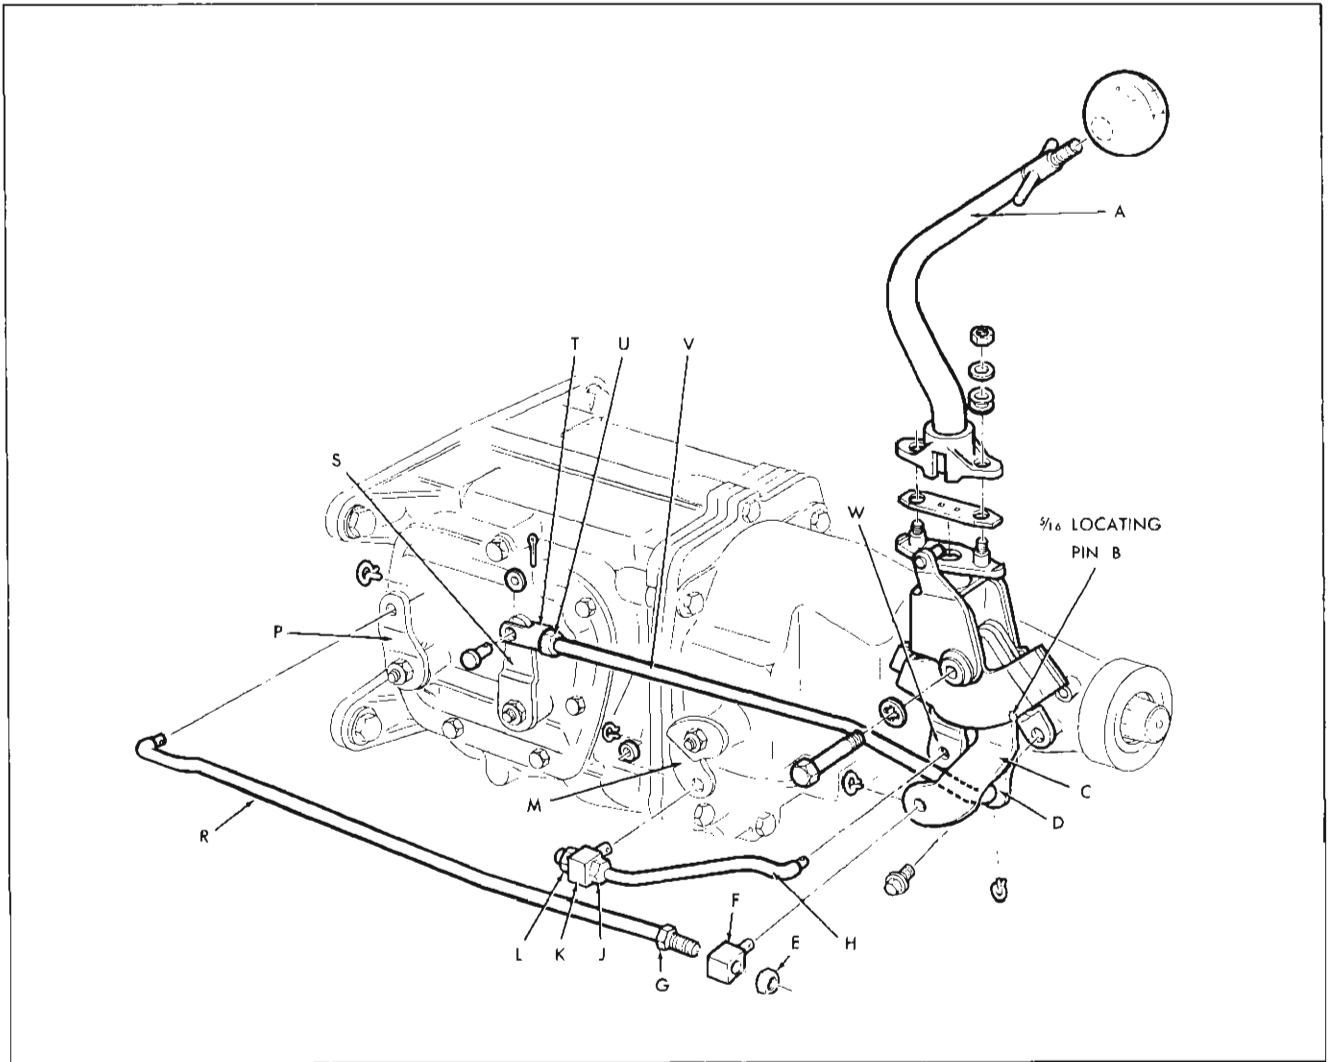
M—Four-Speed Transmission Gearshift Linkage
